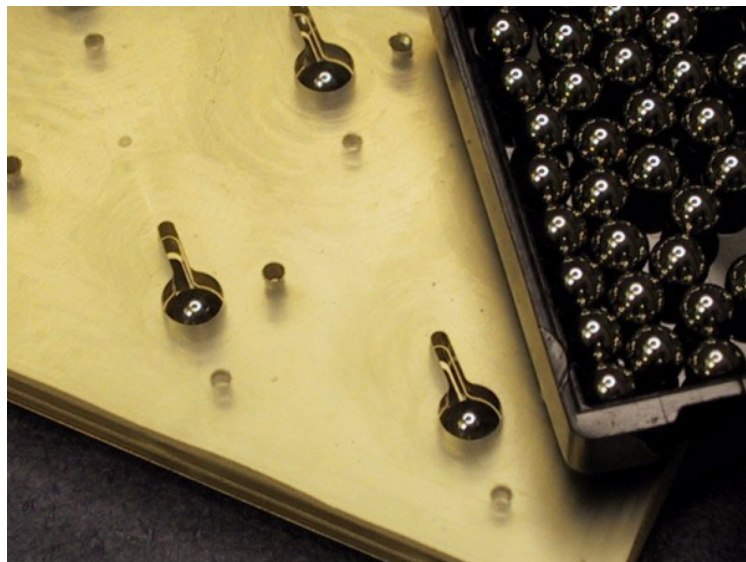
Iron balls with a diameter of $3\ \text{mm}$ on the assembled PSU ball chamber layers, which were bought from the company Britannia Waelzager & Industrietechnik GmbH.
